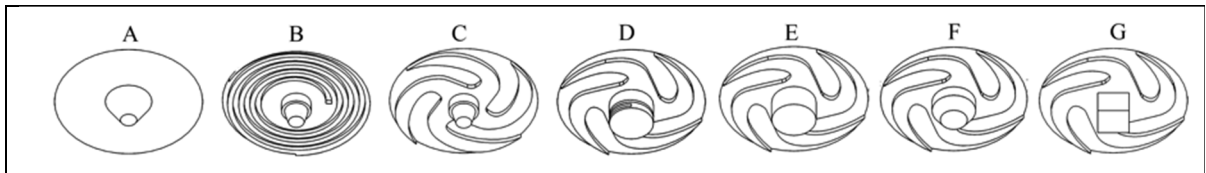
Design of the different tool configurations: (A) Flat shoulder with conical pin, (B) Raised spiral shoulder with stepped conical pin, (C) Raised fan shoulder with stepped conical pin, (D) Raised fan shoulder with threaded cylindrical pin, (E) Raised fan shoulder with cylindrical pin, (F) Raised fan shoulder with tapered cylindrical pin, (G) Raised fan shoulder with cubic pin.
